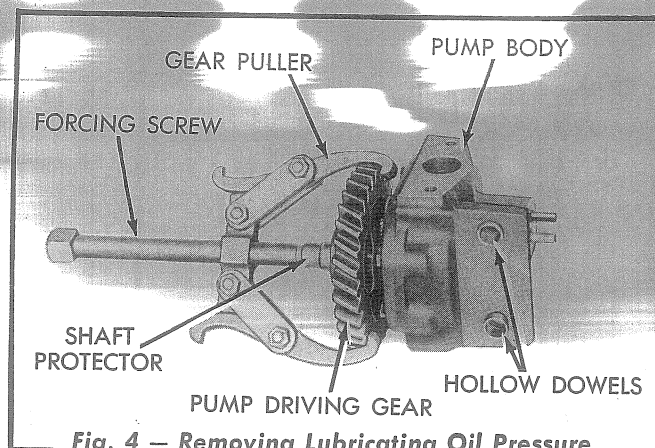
Removing Lubricating Oil Pressure Pump Driving Gear
